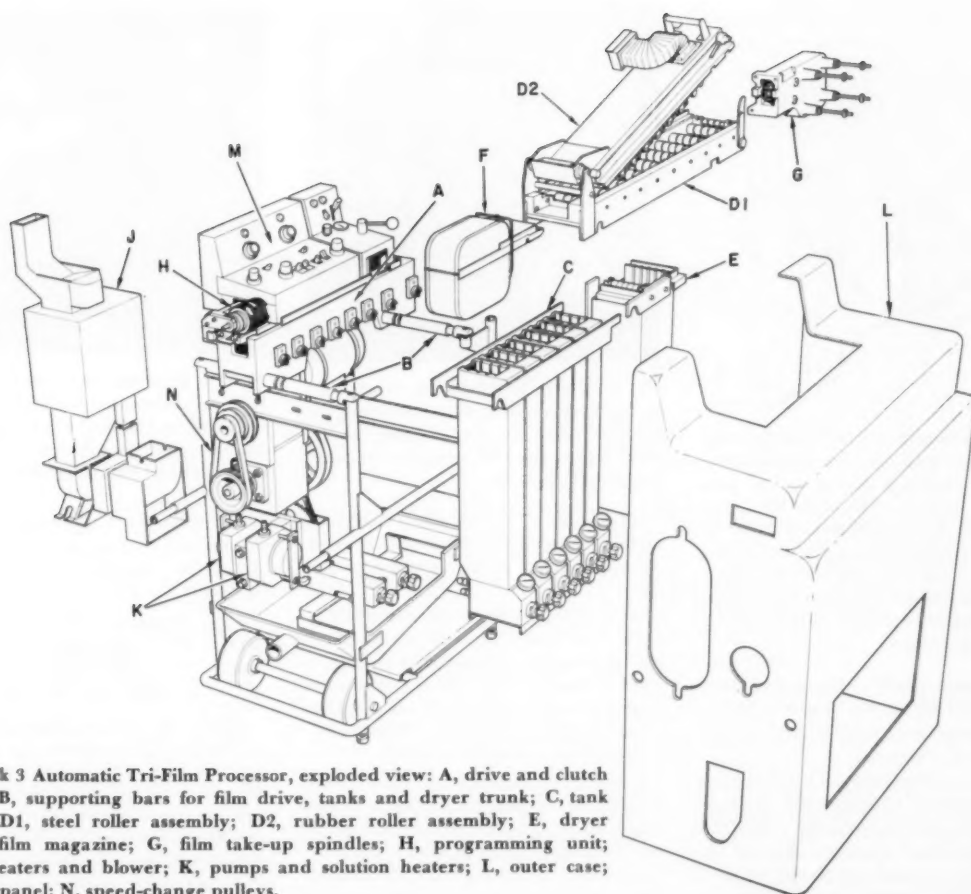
Mark 3 Automatic Tri-Film Processor, exploded view: A, drive and clutch assembly; B, supporting bars for film drive, tanks and dryer trunk; C, tank assembly; D1, steel roller assembly; D2, rubber roller assembly; E, dryer trunk; F, film magazine; G, film take-up spindles; H, programming unit; J, dryer heaters and blower; K, pumps and solution heaters; L, outer case; M, control panel; N, speed-change pulleys.
